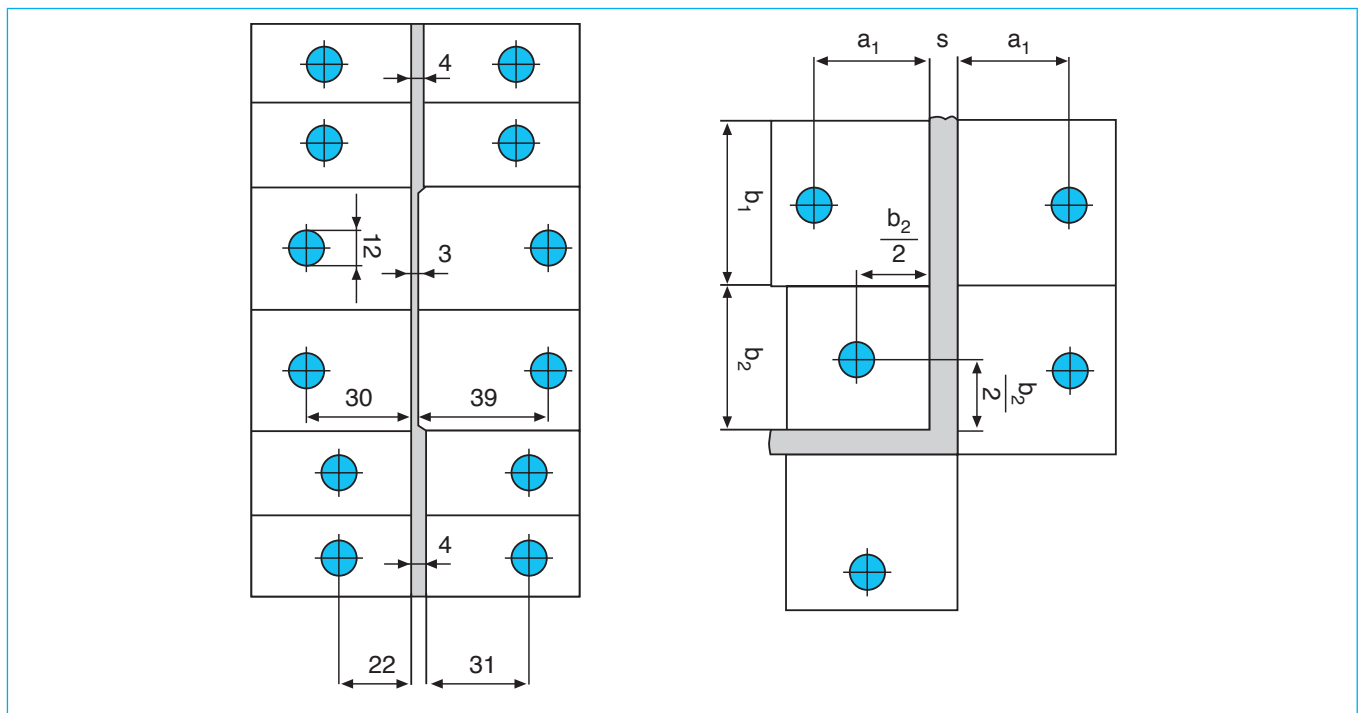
Segmented heating/cooling system design: left: changes in wall thickness, right: molded part corners [10]
